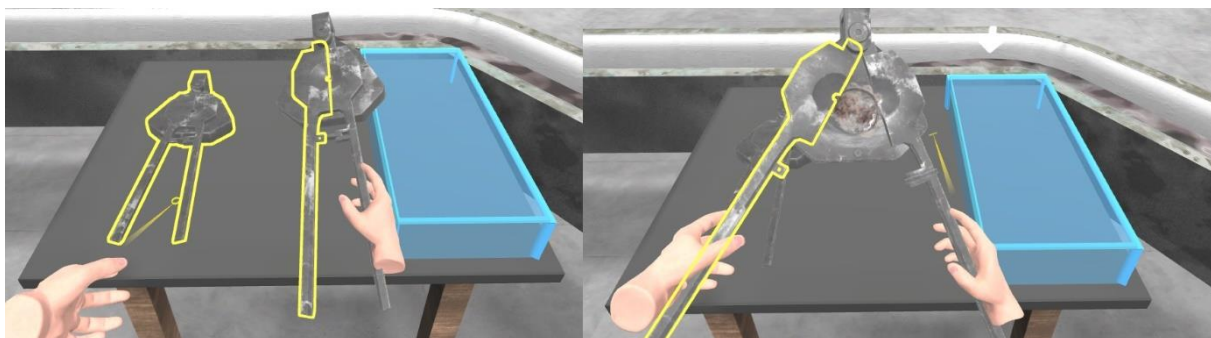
Left: User is grabbing the right mold. Right: User has opened the mold to inspect the inside part
